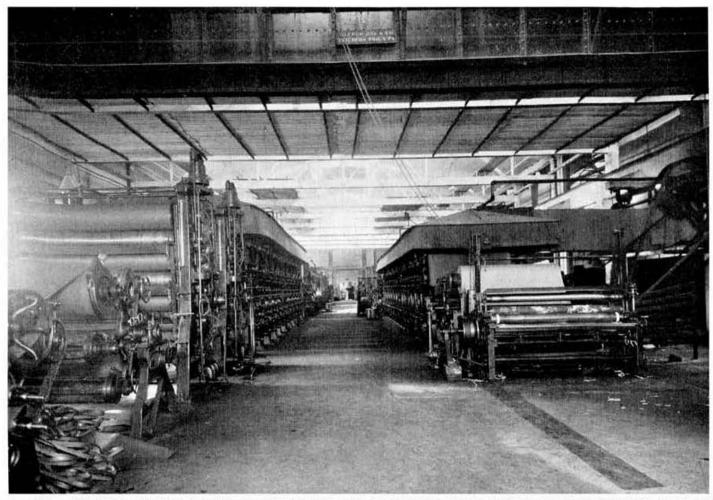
c1923 VIEW NORTHWEST OF DRY END OF PAPER MACHINES IN ORIGINAL BUILDING 5
